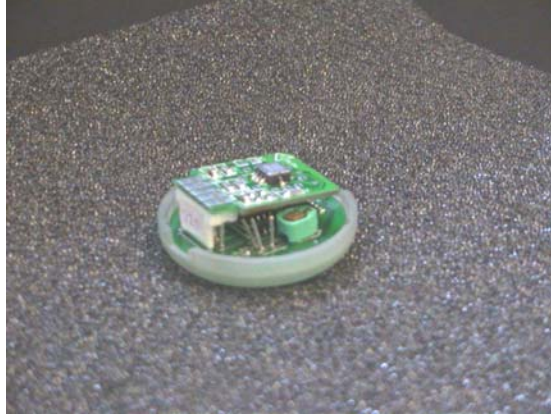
Sensor PCB and PCB with components soldered in place
